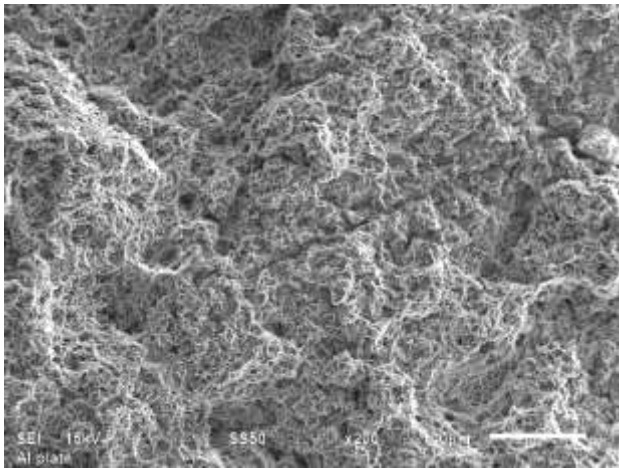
The SEM image shows the fracture Surface of the PM+HIP sample after tensile testing
